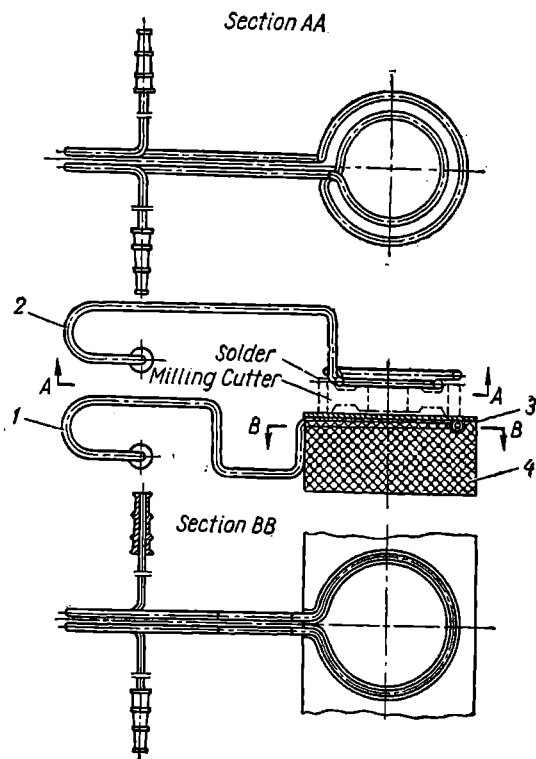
Device for simultaneous brazing of multi-blade milling cutters with carbide tips on induced heat apparatus
